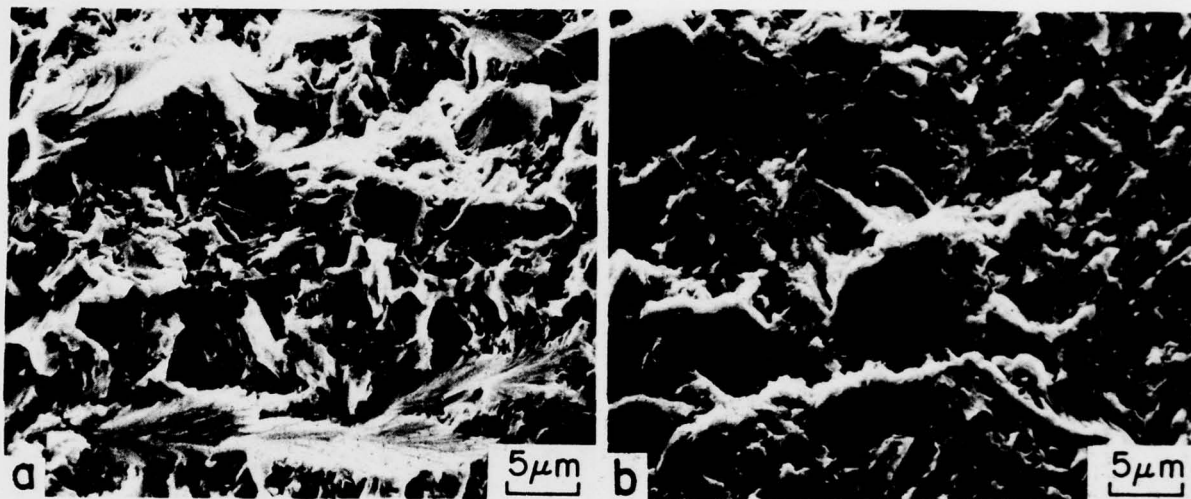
Fracture surface of Condition 7 tested at 20 Hz in dry air.
